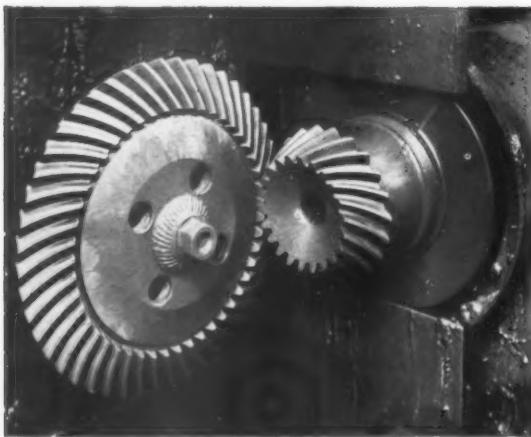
Spiral bevel gears in course of being lapped in bevel lapping machine. The abrasive is suspended in oil and pumped into the mesh.
